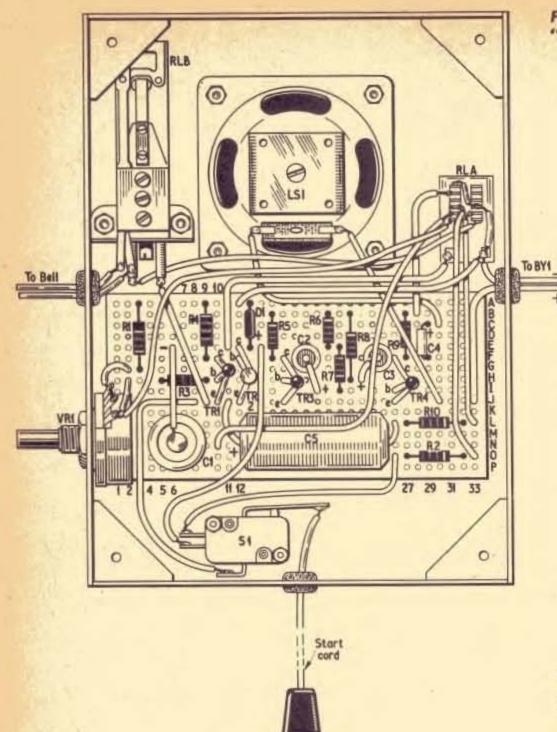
(left). Complete wiring details of the unit. The "start" cord is soldered to the microswitch lever
